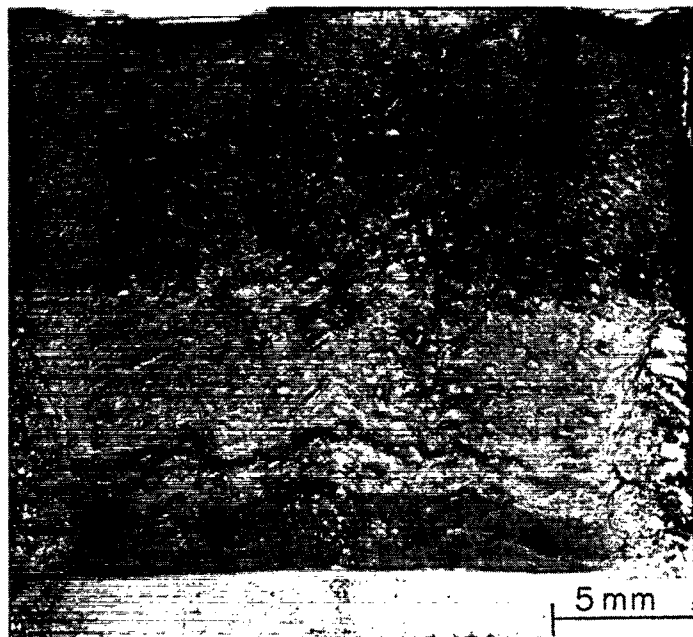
Fracture surface of specimen H, the HY-180 fine-bead overtempered weldment
